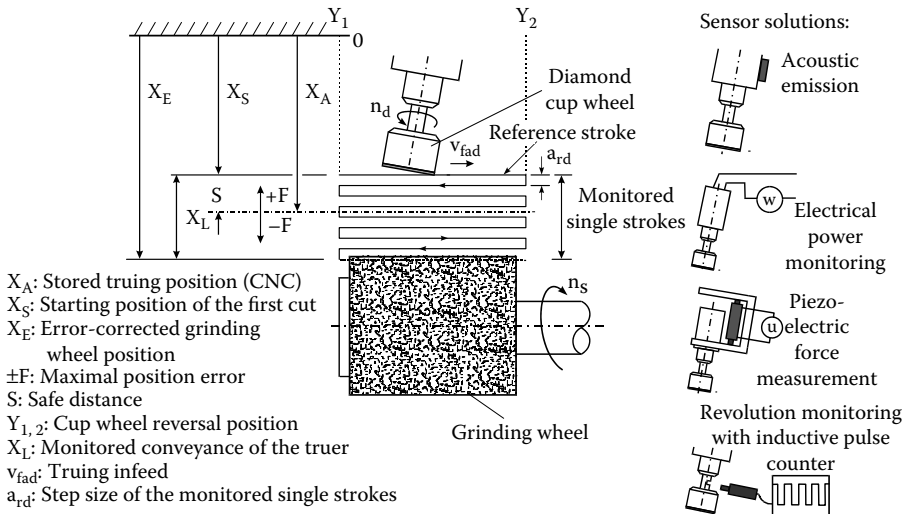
Dressing monitoring with rotating diamond tools.
